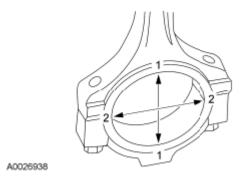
Identifying Connecting Rod Large End Bore Measuring Directions
